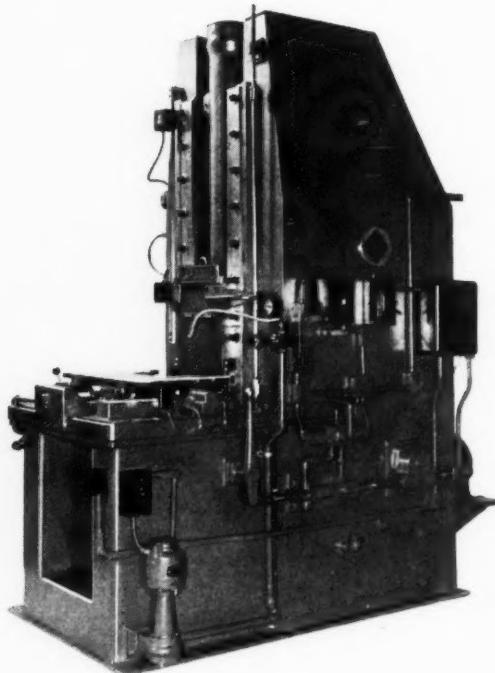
Lapointe Single-ram Surface Broaching Machine
